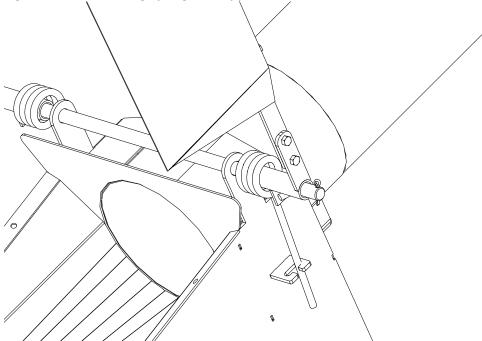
Attaching Upper Sides Frames to Shaft Brackets
